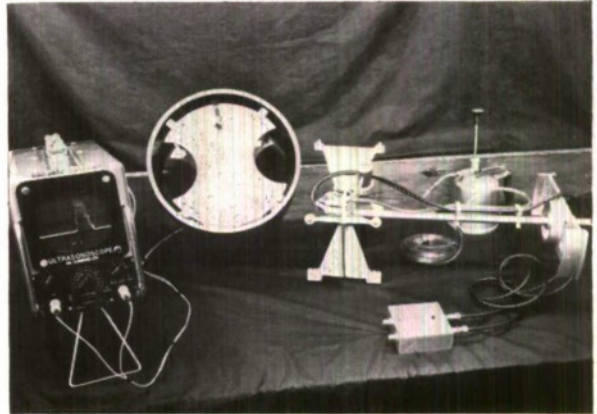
Production equipment and prototype jig positioned in a section of barrel.
